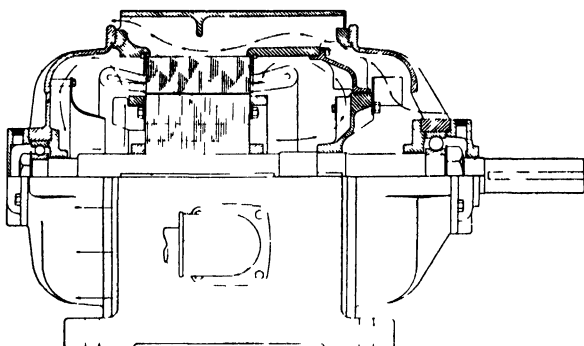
Sectional assembly of totally enclosed squirrel-cage motor with ball bearings
